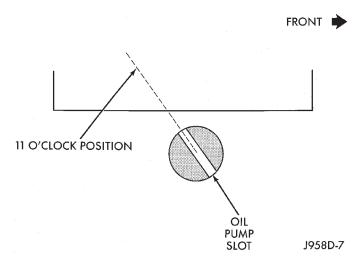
Slot At 11 O'clock Position—4.0L Engine
